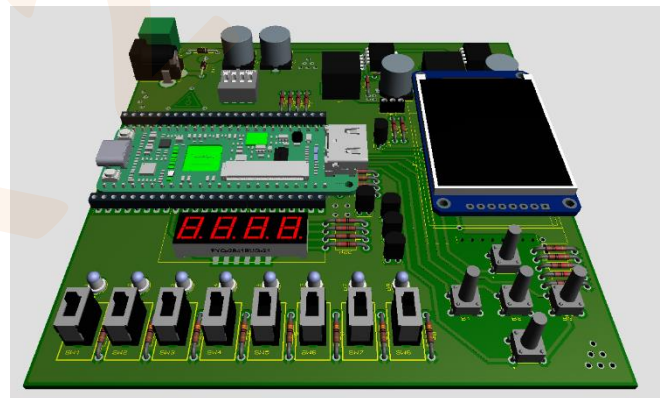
3D render view of the FPGA carrier board PCB with components.
